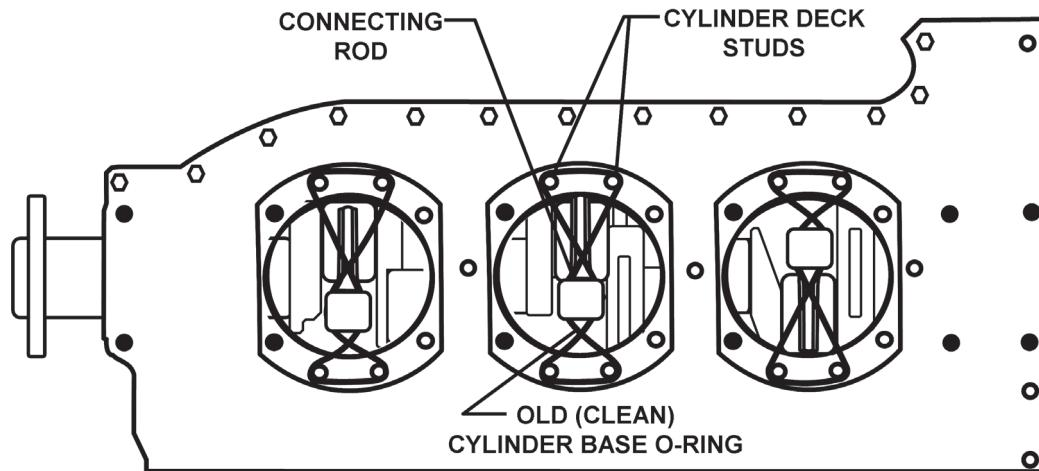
Cylinder Base O-ring supporting the Connecting Rods
